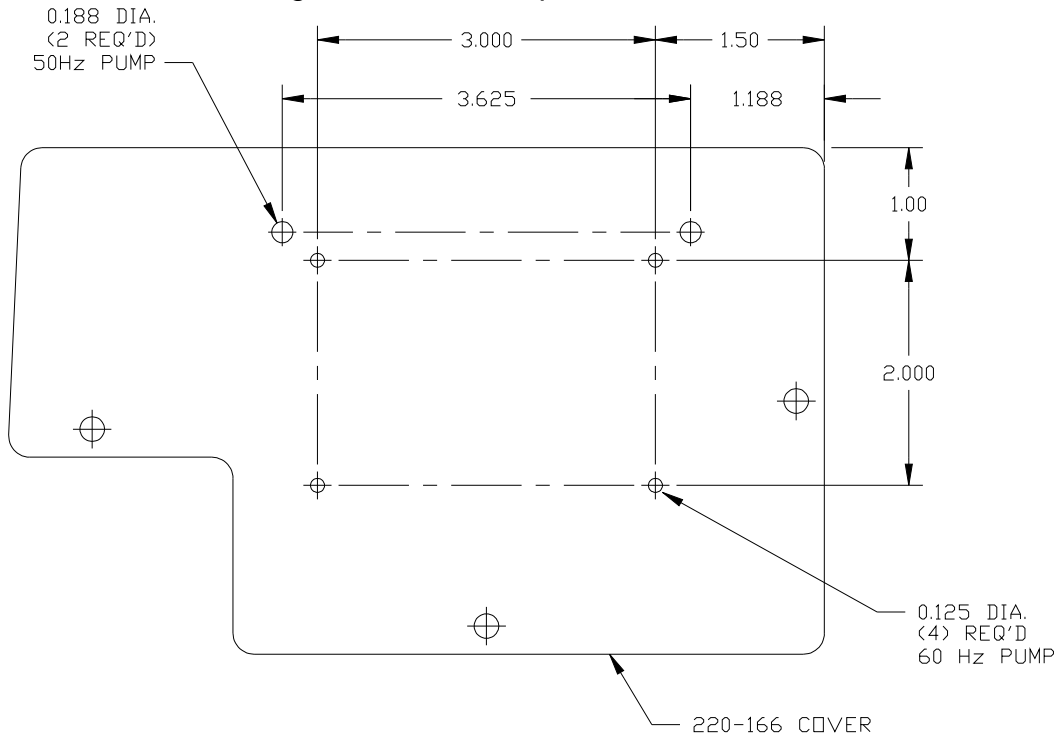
Electrical Cover Modification 50Hz & 60Hz, (Model A Perforators)
